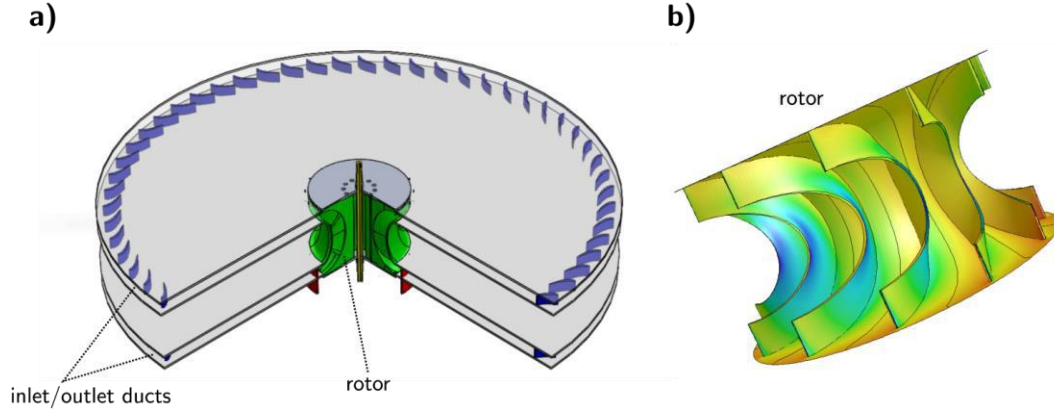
THE BI-RADIAL TURBINE: (A) THREE-DIMENSIONAL VIEW; (B) DETAIL VIEW OF THE ROTOR
